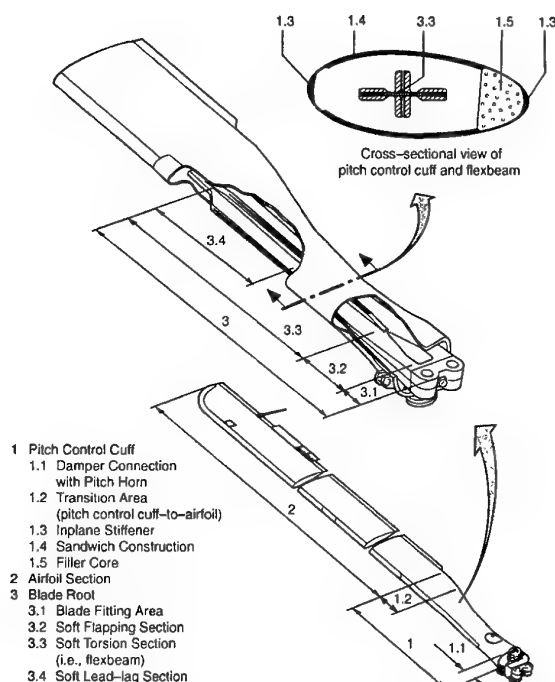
The Blade of the Bearingless EC135 Main Rotor
